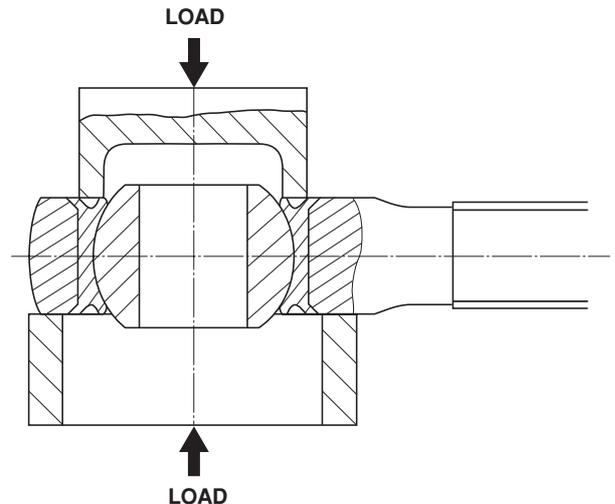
STAKING BEARING PROOF LOAD TEST METHOD
